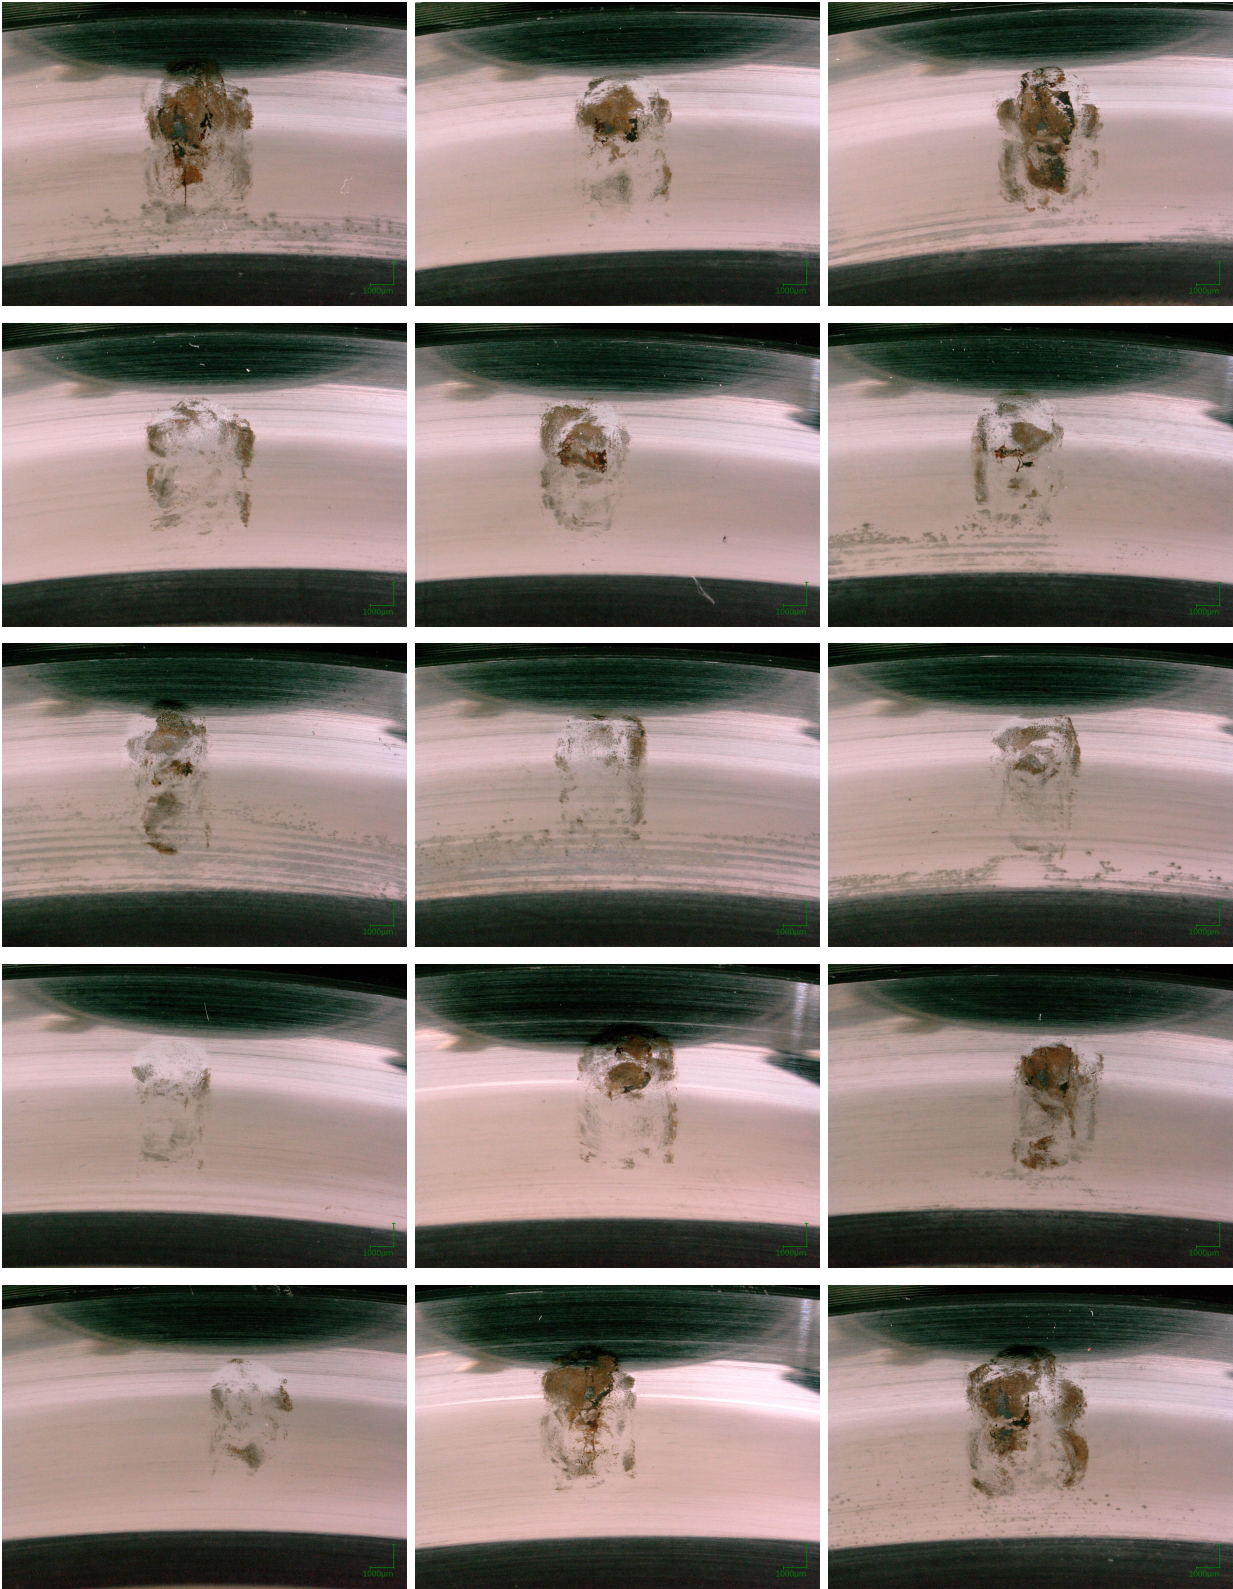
Raceway condition inner ring, Test ID 9, Bearing ID 0013
